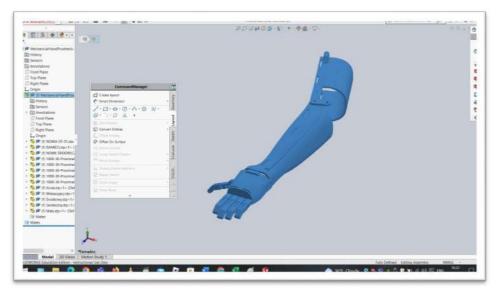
Robotic arm assembly – ASM, SLDASM. File
